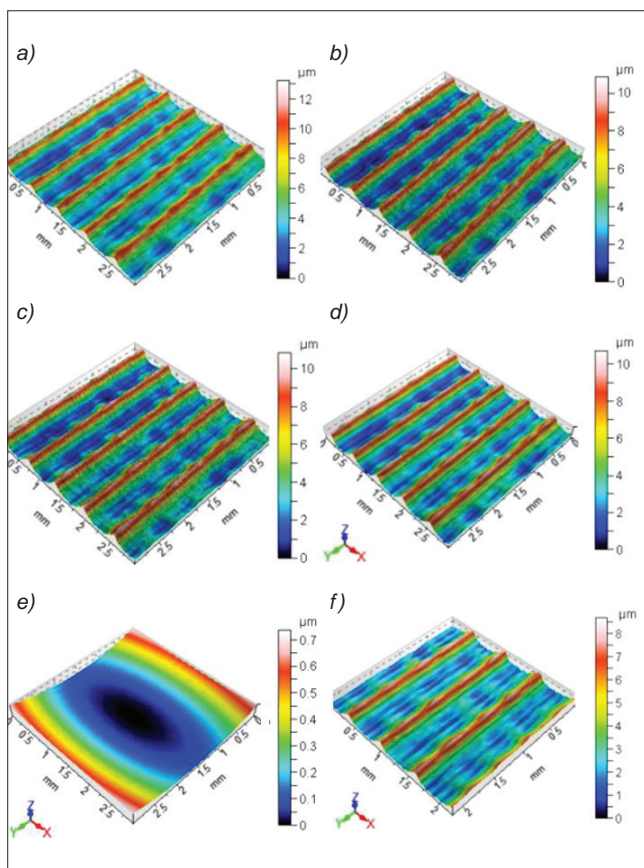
List of isometric images of milled samples: a) reproduced surface; b) cutting out threshold values; c) leveled surface; d), e) removing the shape; f) surface filtration
